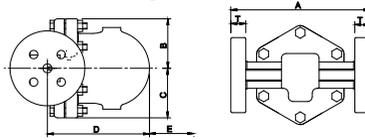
Dimensional Drawing of FMLDT53-Screw Connection
